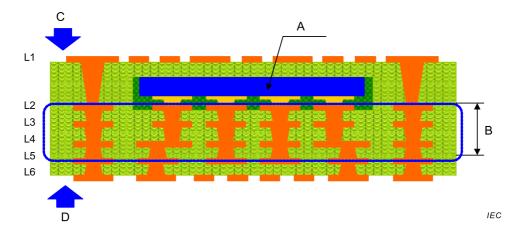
Definition of top and bottom surfaces for mounting on a mother board
